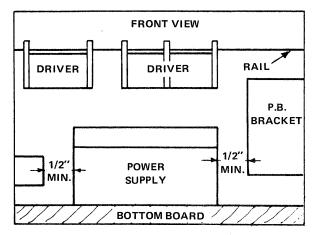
A Maintain 1/2" clearance minimum between the Trap Levers and PCB Bracket and the Power Supply as shown above.
